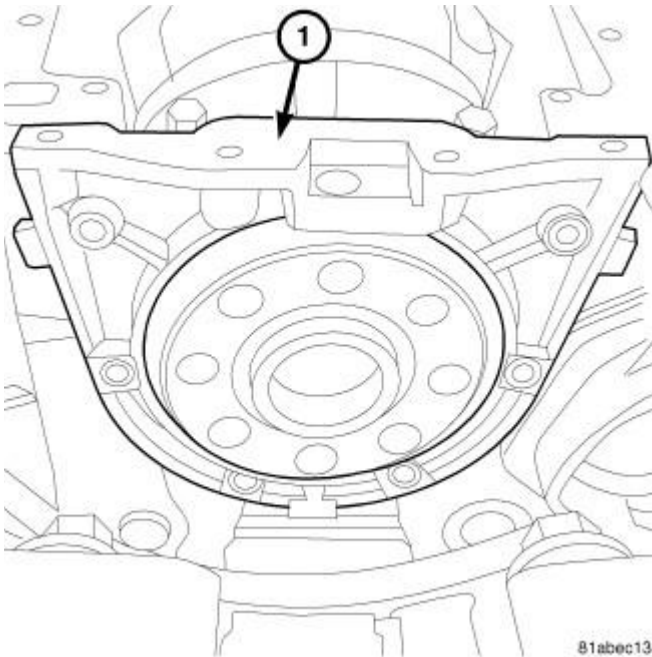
Rear Crankshaft Seal & Rear Main Oil Seal Carrier
